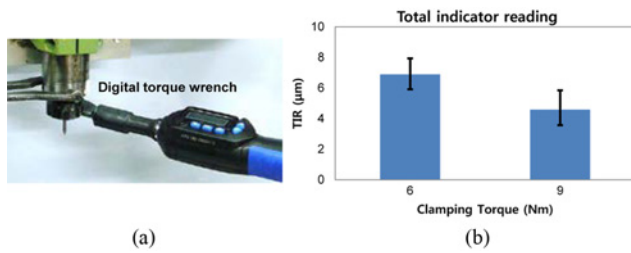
(a) Clamping of the micro-end mill to the spindle chuck using a digital torque wrench, (b) TIR data for different clamping torques
